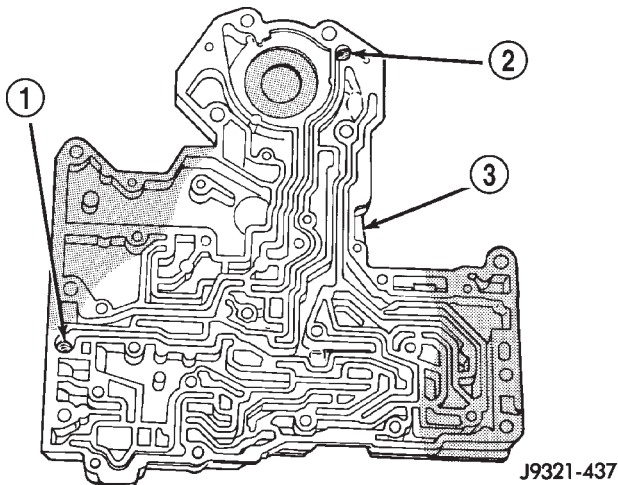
Rear Clutch And Rear Servo Check Ball Locations
